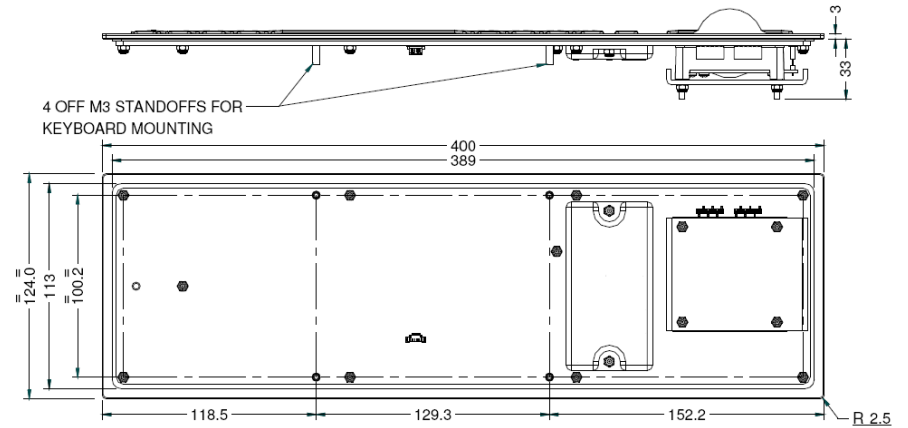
J86-4400 keyboard dimensions (all dimensions in mm).
